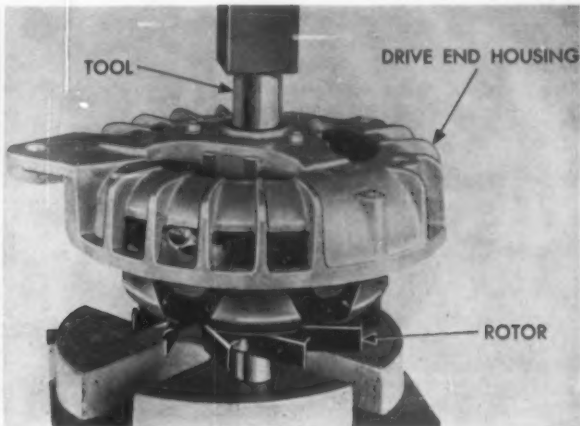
Installing drive end frame and bearing on rotor shaft.
